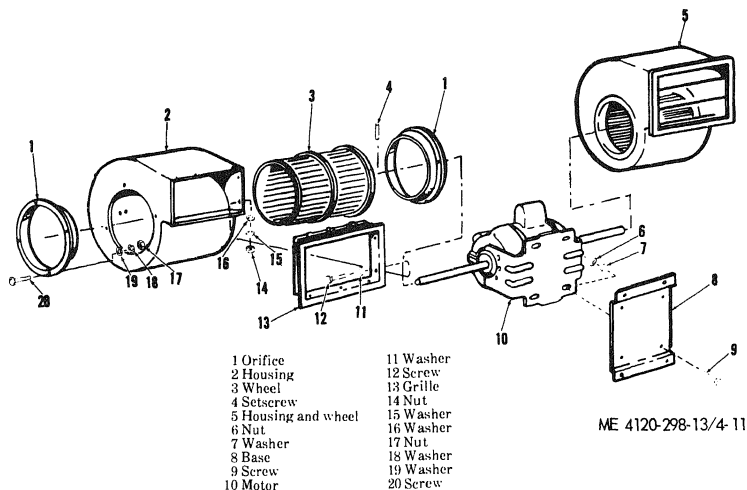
Condenser and evaporator fan, disassembly and reassembly.
